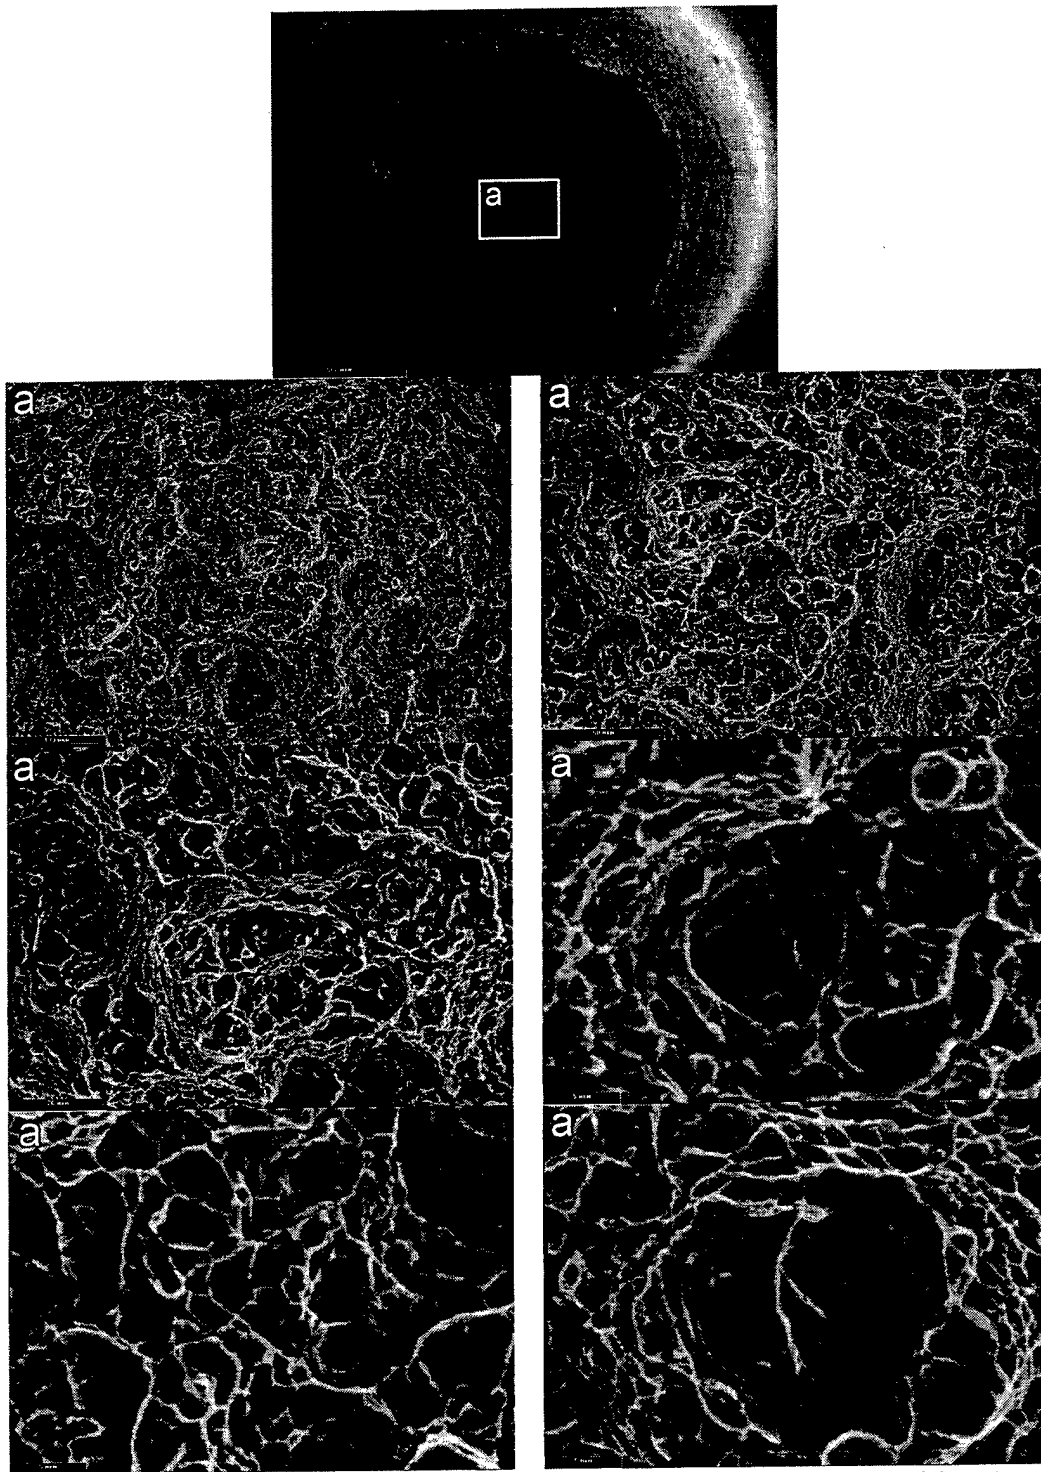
Fracture surface of Ti-15-3 in RR condition #13 (table 10, aging at 300°C, 8h + 538°C, 8h).
